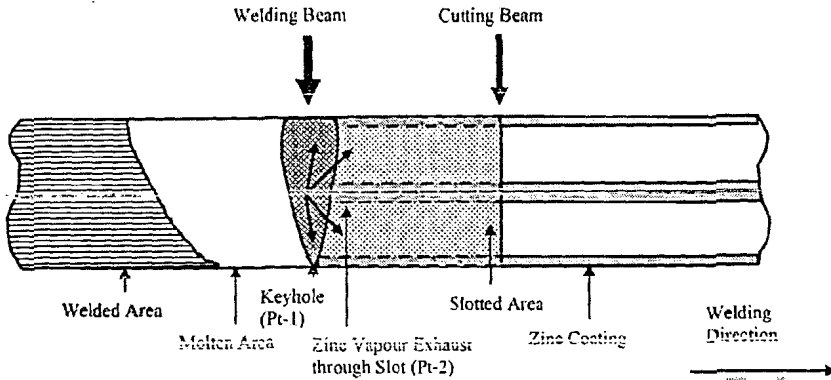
Side view of the welding operation with the two beams in tandem.
